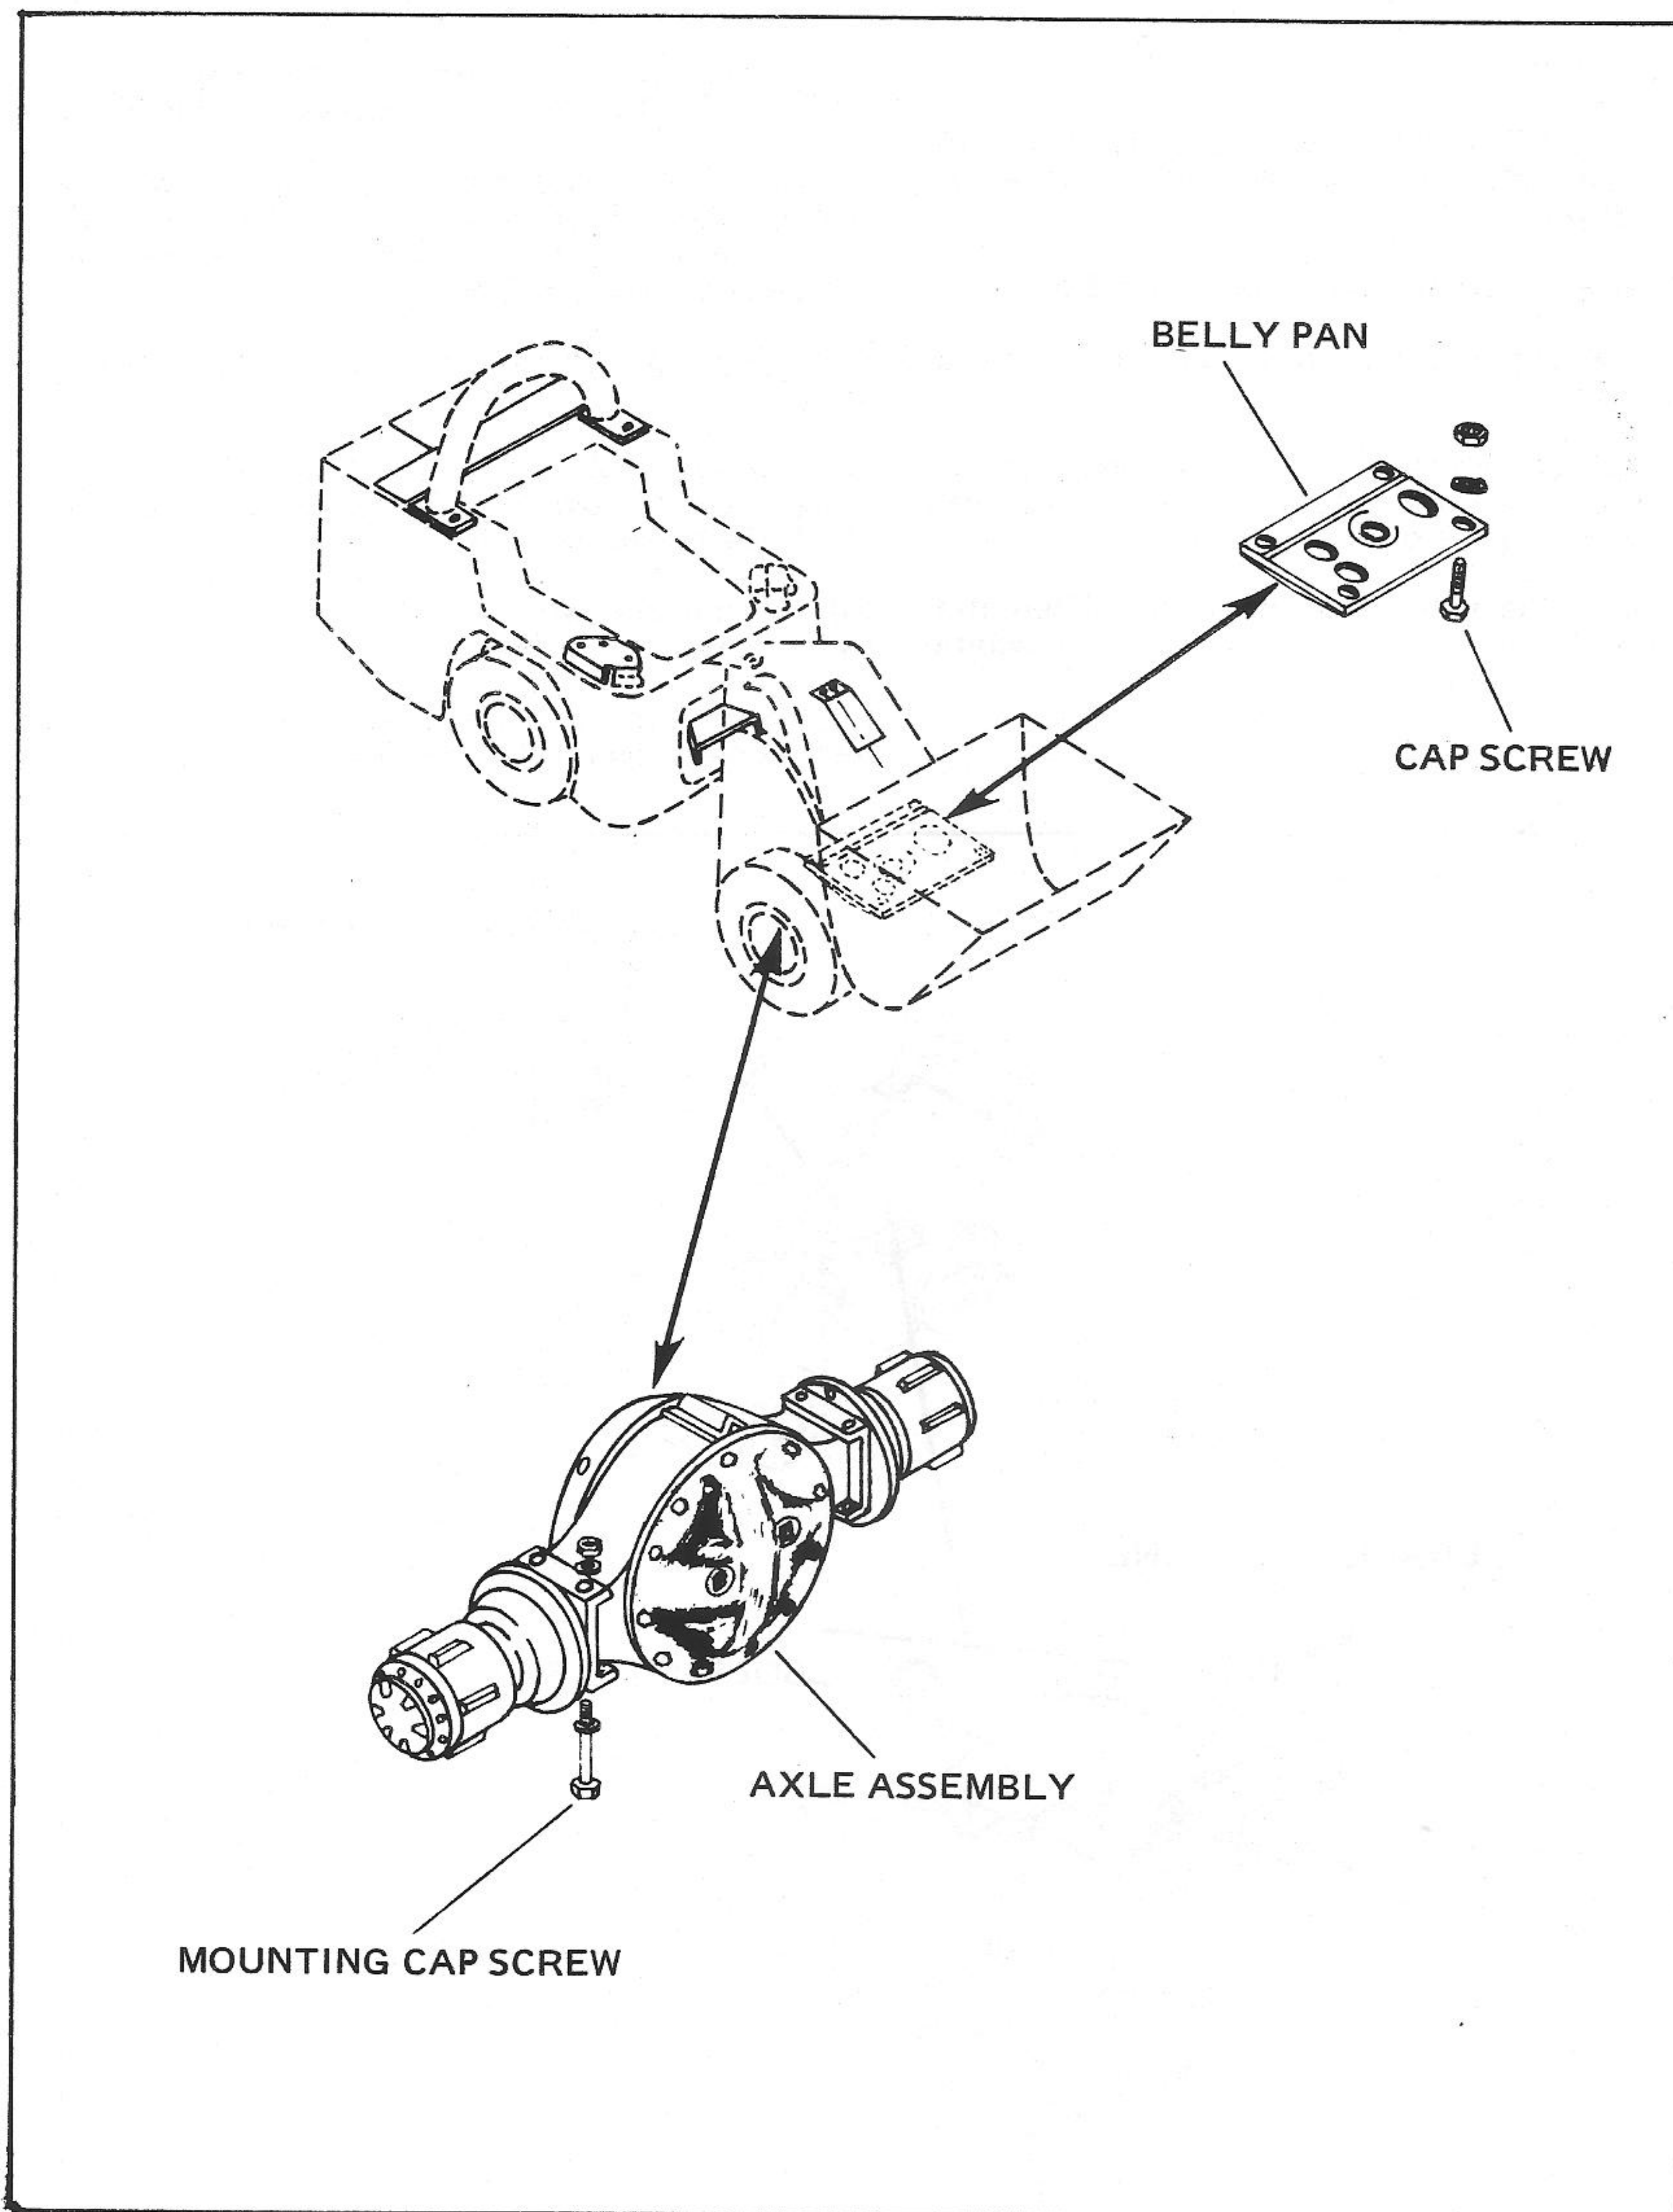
2. FRONT AXLE INSTALLATION
